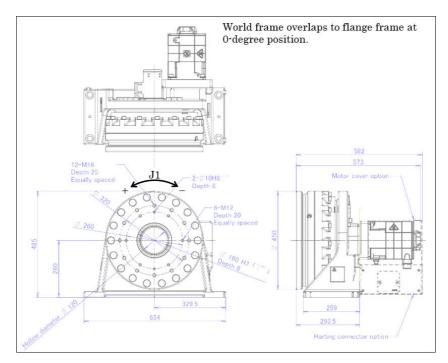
(b) 1000kg/1500kg payload 1-axis positioner (Hollow type) world frame and flange frame
